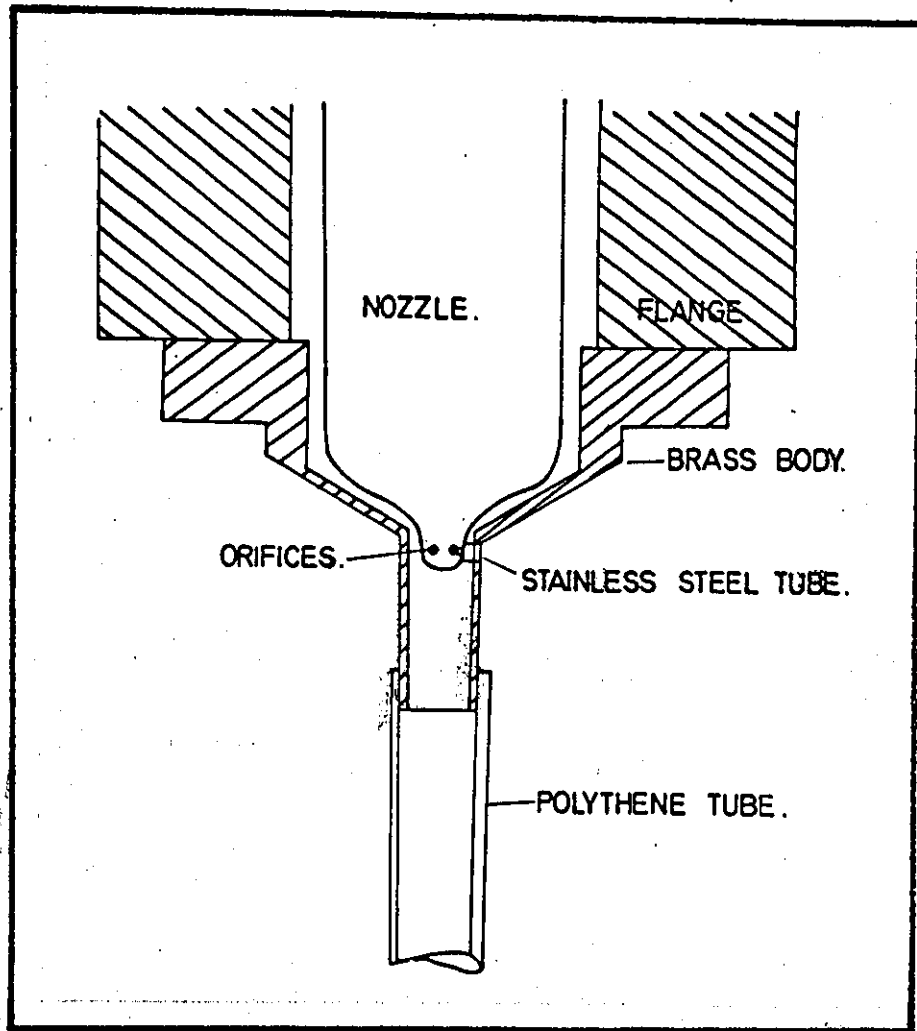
Cross section of nozzle hood assembly showing the stainless steel insert.
